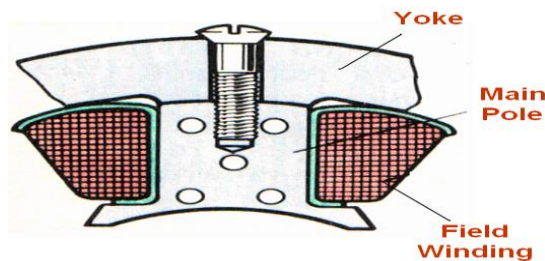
Cutaway view of DC Machines away view of DC Machines
